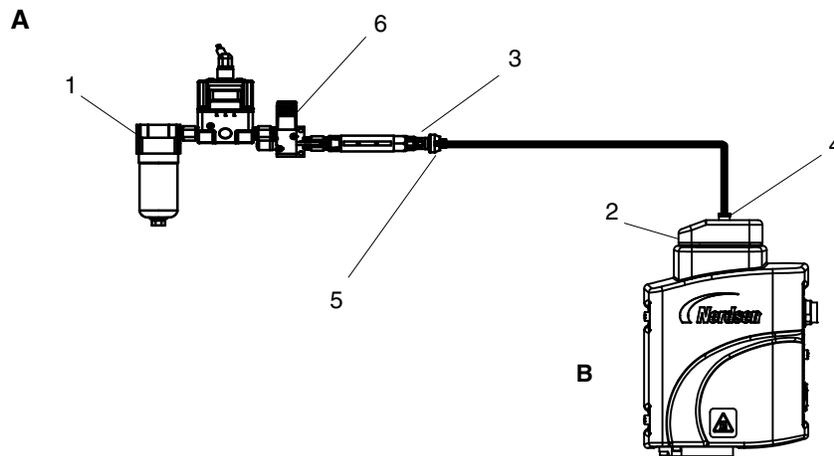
Air connections (A: Pneumatic kit/B: Applicator assembly)
